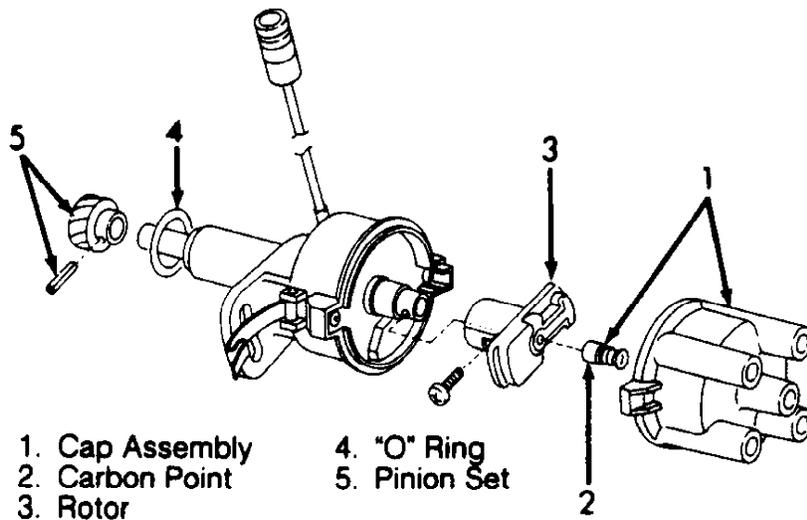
Exploded View Of Distributor (Justy 1.2L PFI)
